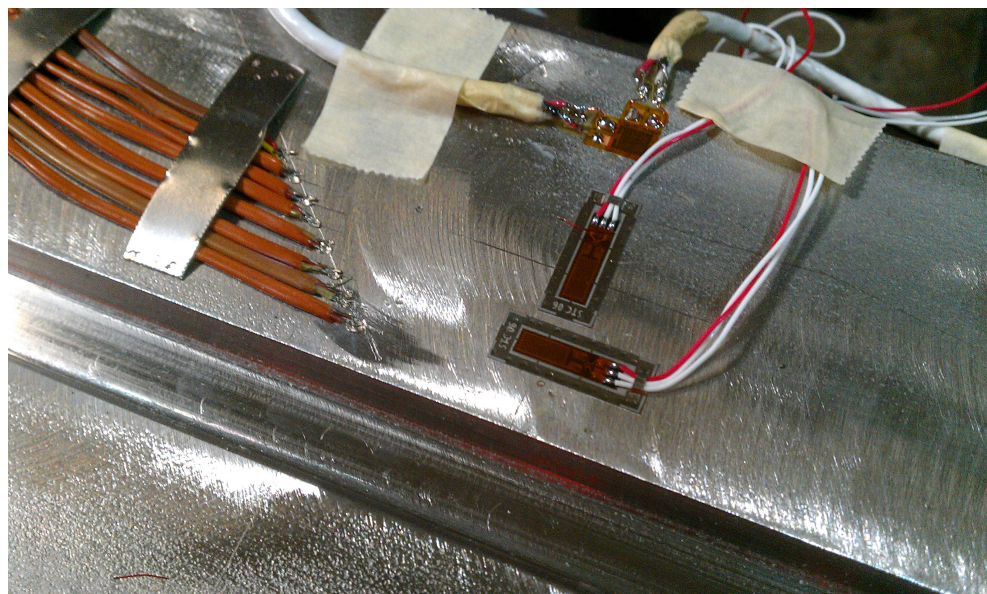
Strain gages and thermocouples used during welding
